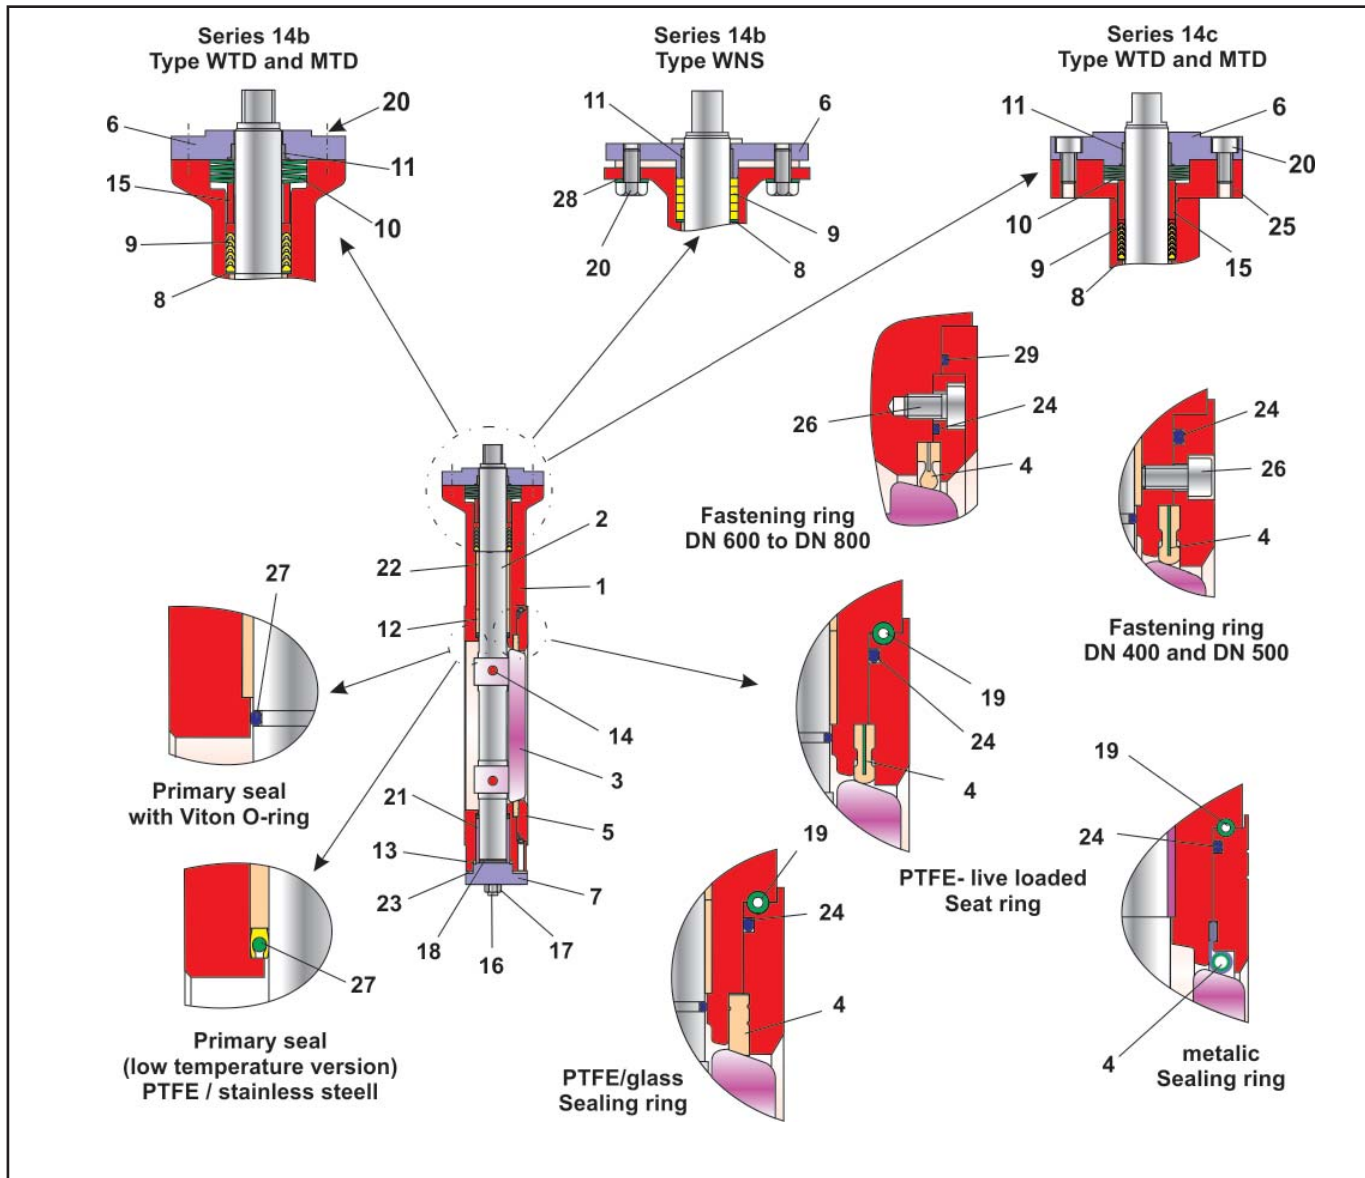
Sectional diagram of Series 14 Butterfly Valve
